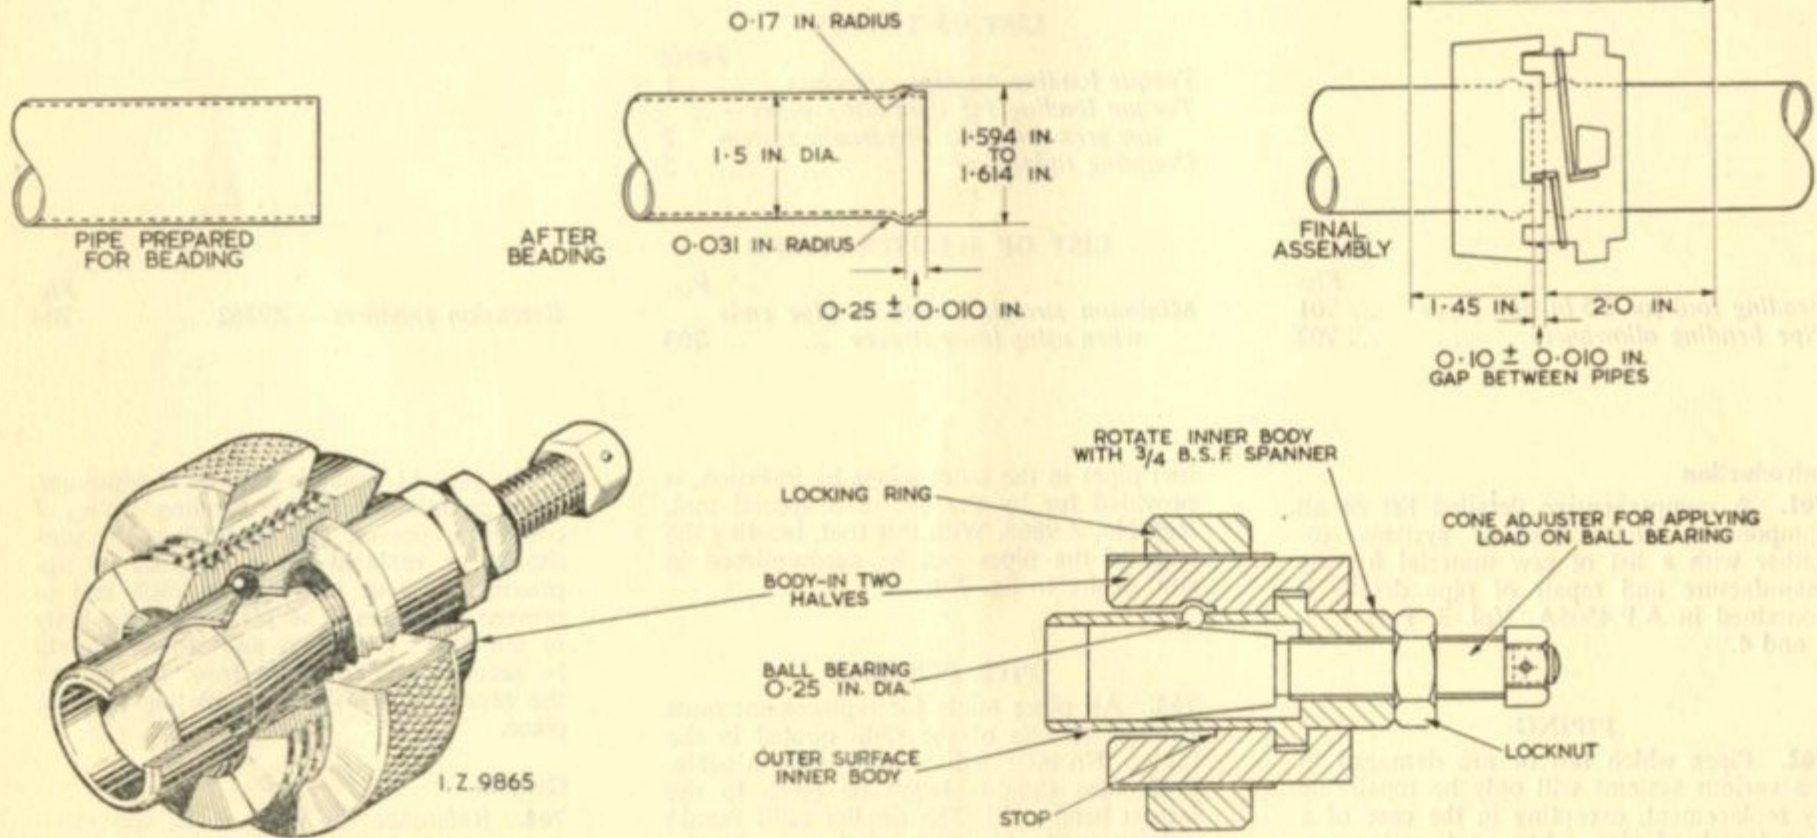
Beading tool for 1.5 in. dia. pipes (using F.R.S.110/K type couplings)
